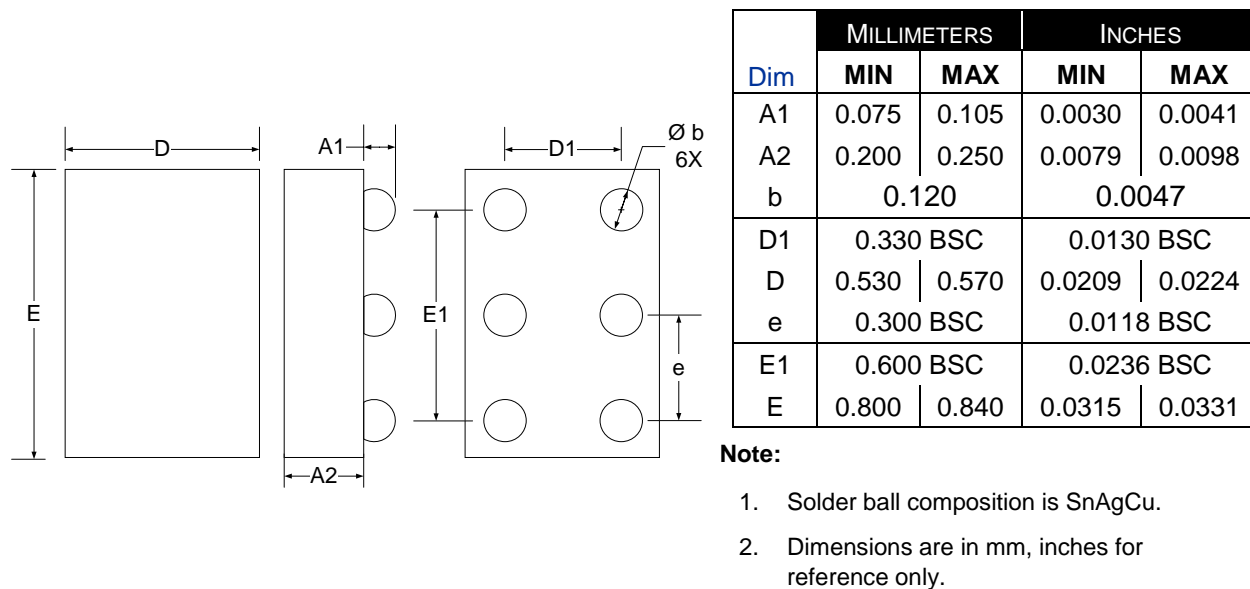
6 Bump X2CSP Micro SMD Package Dimensions
